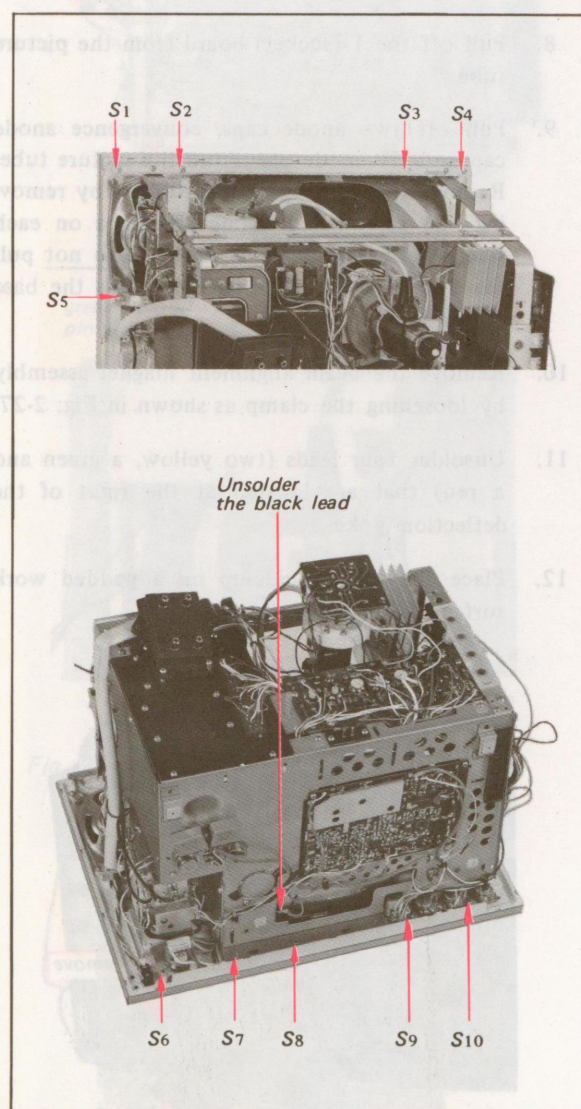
Picture-tube removal, Steps 13 and 14
